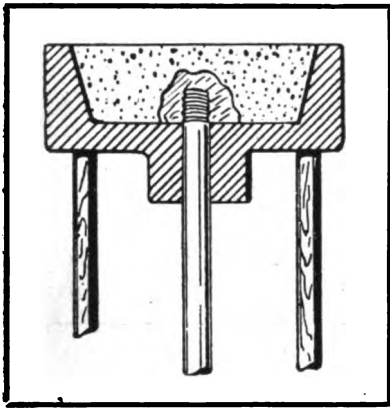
A Removal Method to Which Stubborn Flywheel Will Yield.
